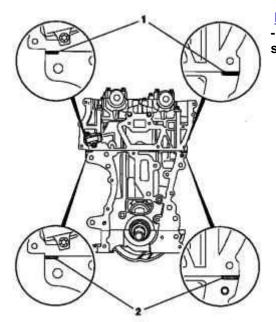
Scheme laying sealer: 1 - Cylinder head gasket, 2 - roller silicone sealant
